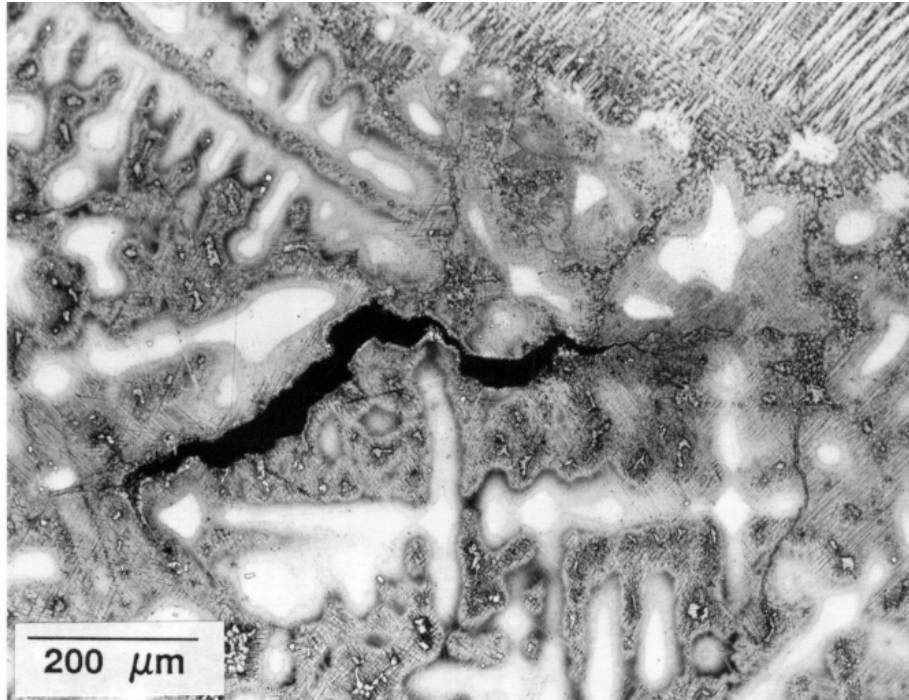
DEFECT TYPES OBSERVED IN RETIRED COMPRESSOR REAR FRAMES:
